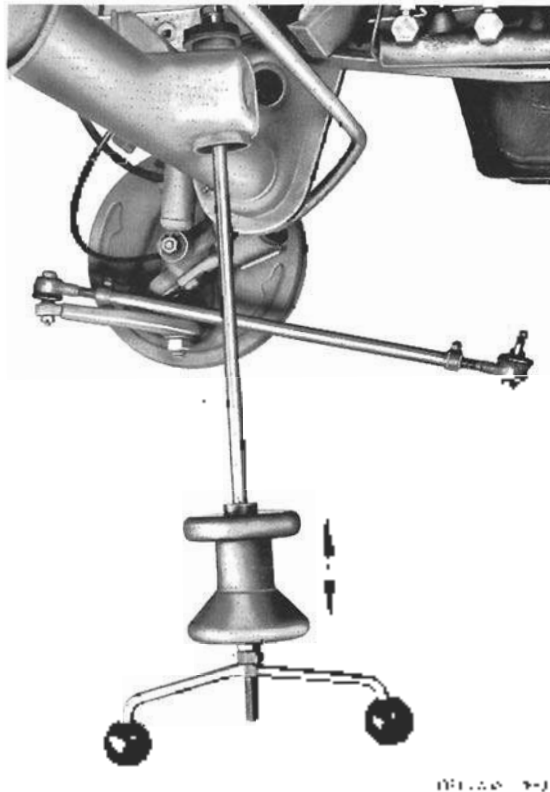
Bushing being driven out. Move the hammer as indicated by the double arrow.
